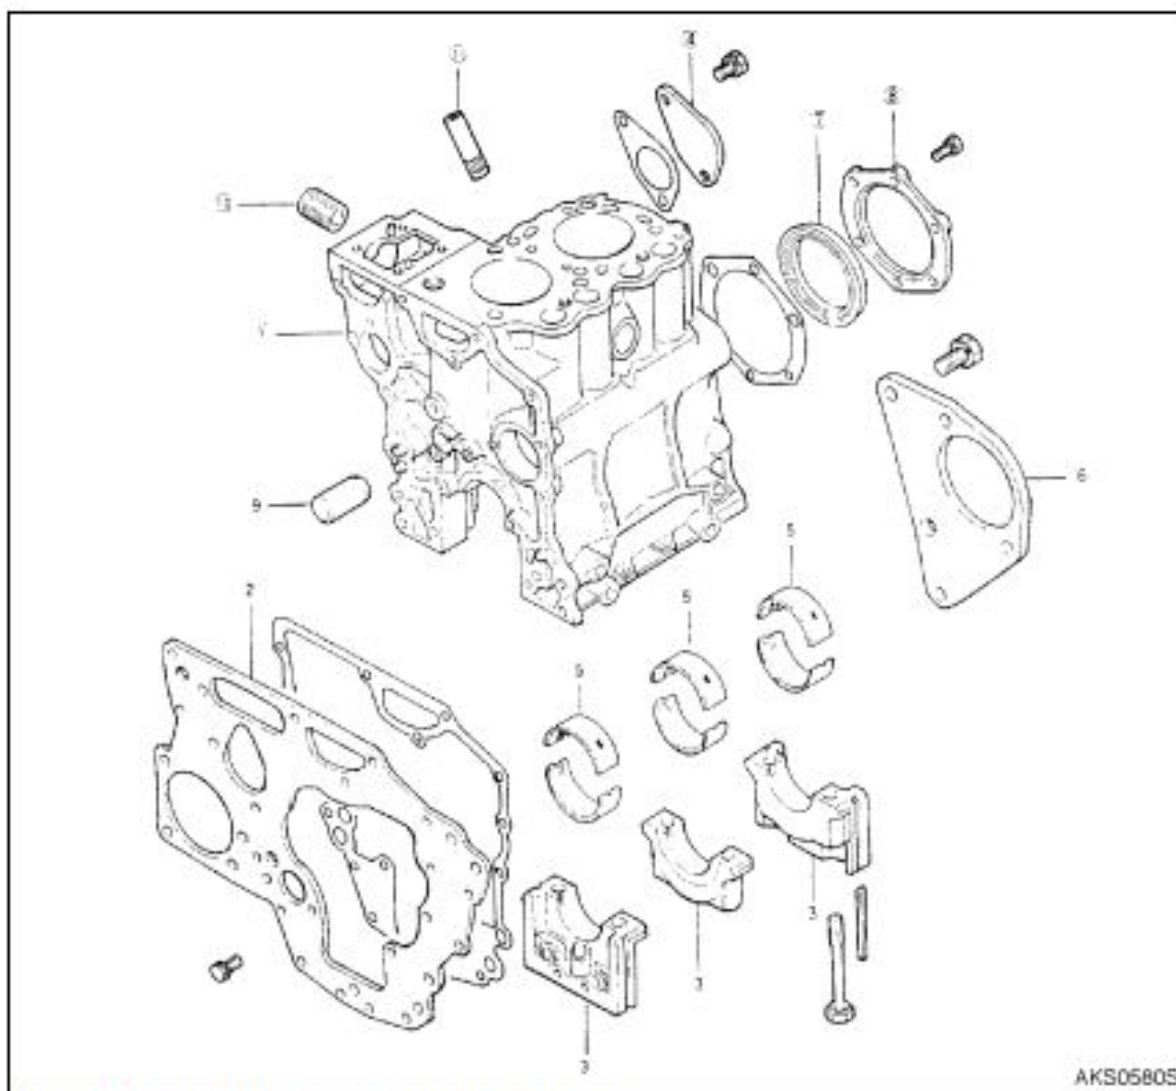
CYLINDER BLOCK COMPONENT PARTS
